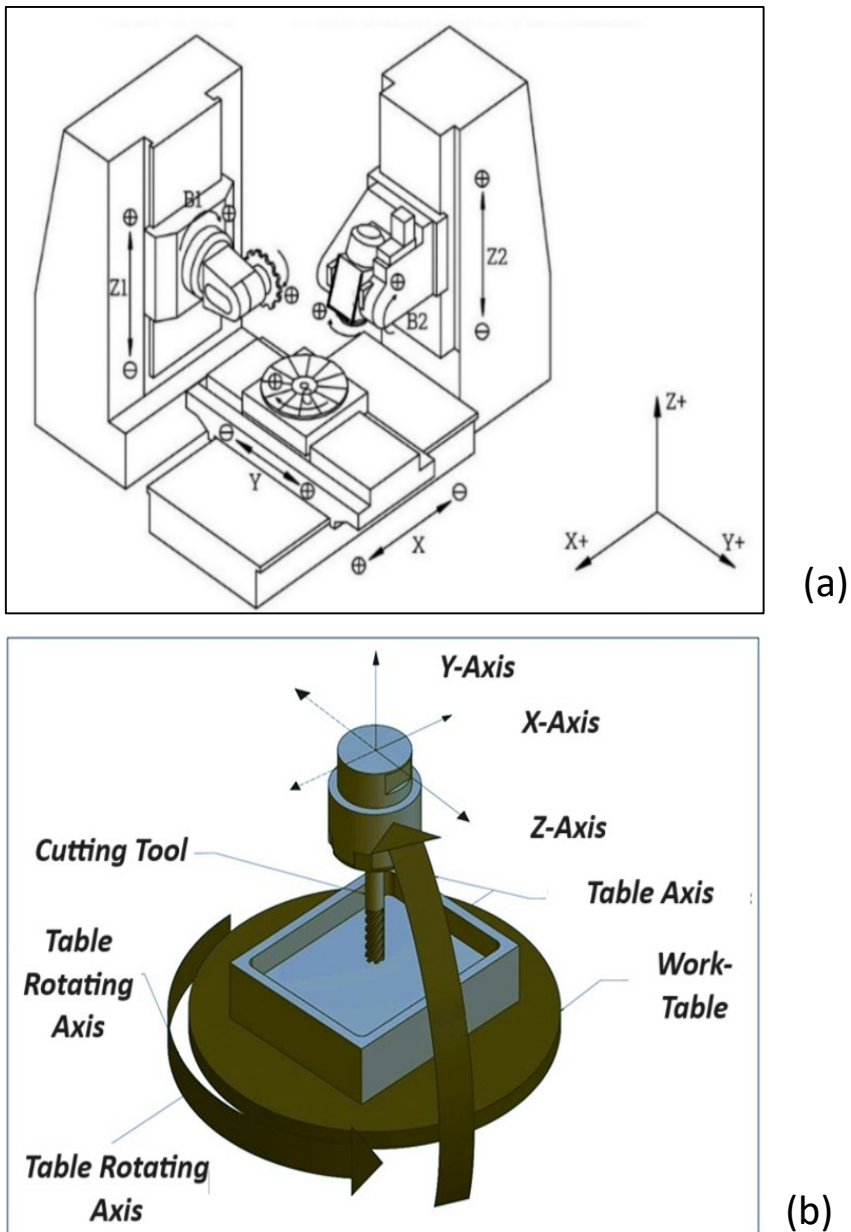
(a) 5-Axis CNC Machine (b) 5-Axis Rotation
